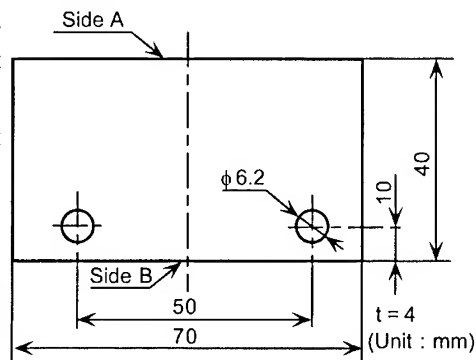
Size and shape of specimen for Local Tensile Strain cracking test.
